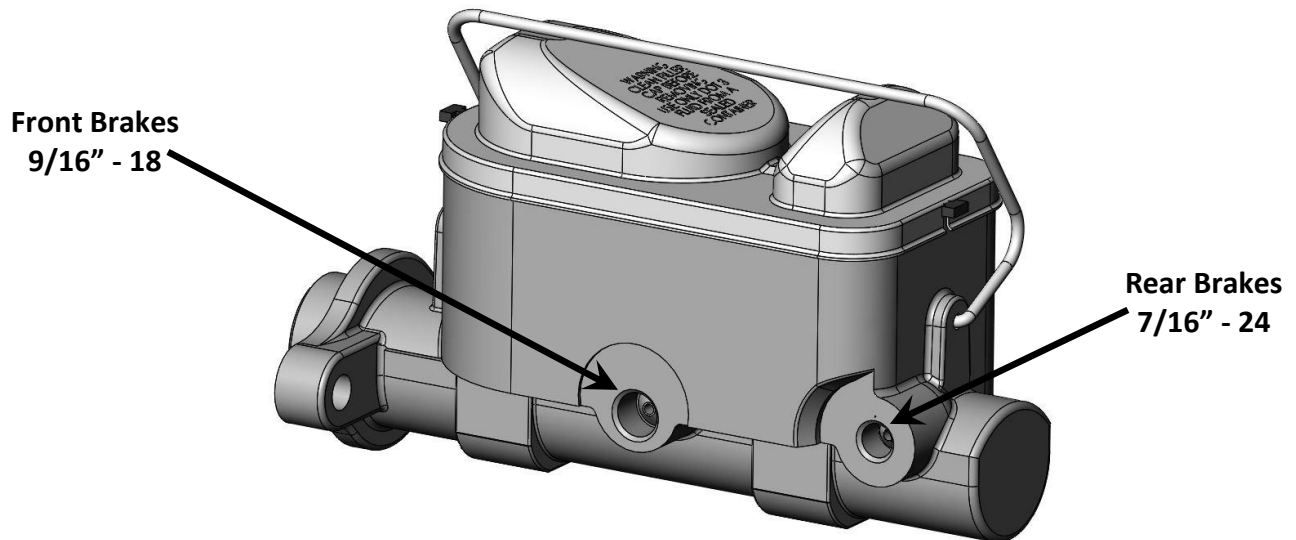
Brake Line Routing for 1-1/8" Bore Master Cylinder (MC11897P/M)
